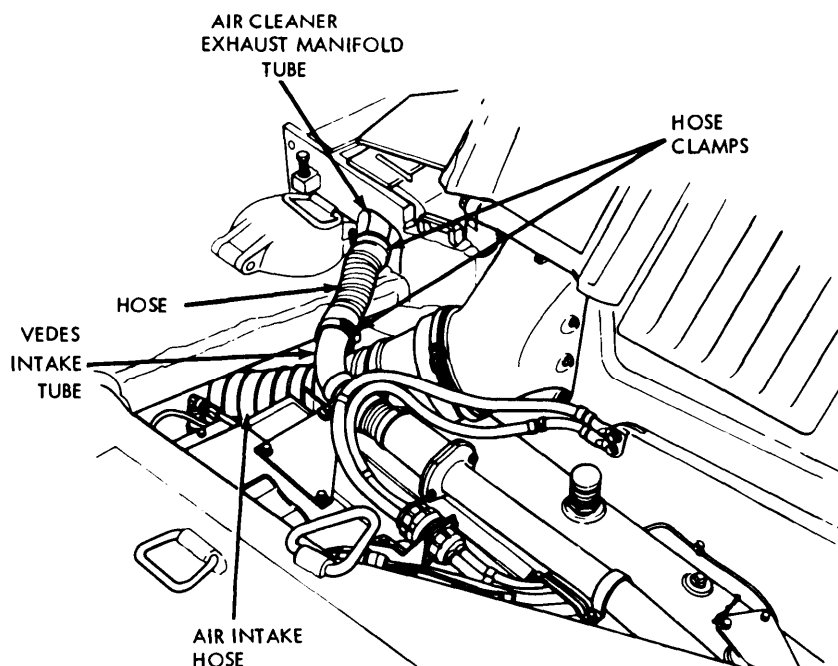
VEDES intake tube hose removal/installation (powerplant replacement).
